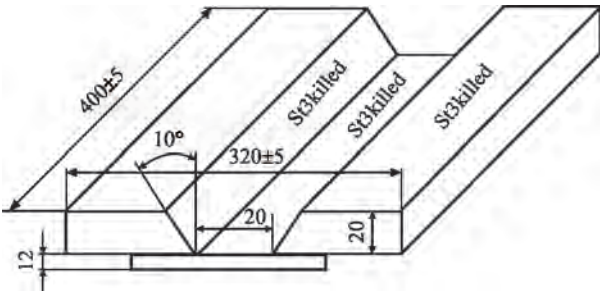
Scheme of butt joint preparation to cut out weld metal samples in accordance with ISO 14 [7]
